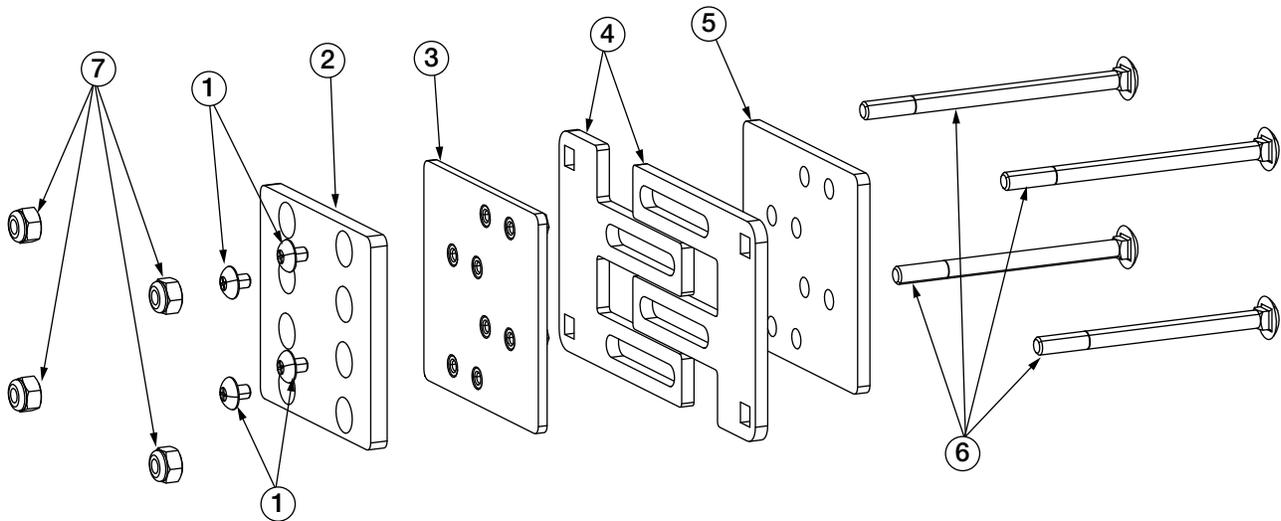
Mount Assembly, Power/Communication Box (For PN 153616)
